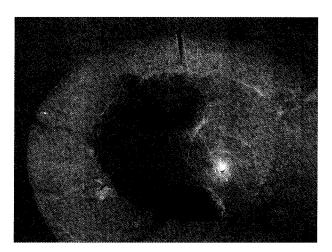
Photograph showing brittle macro-cracks near the punched hole of liner #1.
